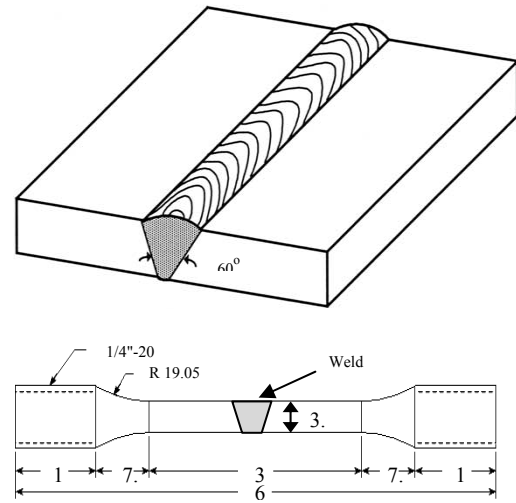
Schematic illustration of the welded joint and specimen used in the quasi-static and dynamic tests. Dimensions in mm.
